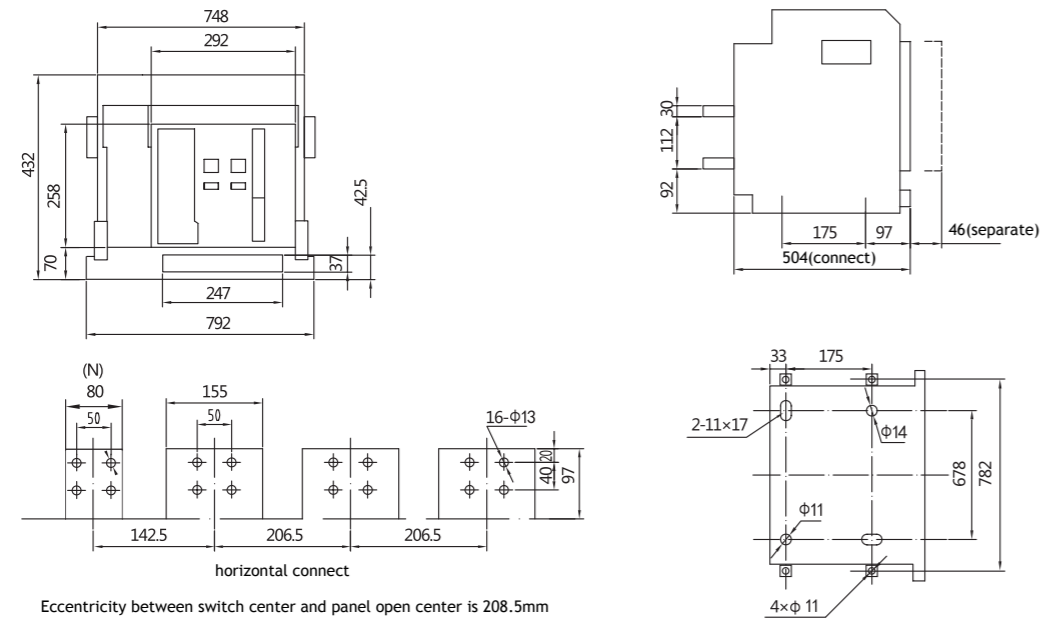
RDSW6-6300/3P (In=4000A,5000A)drawer type install and shape dimension
